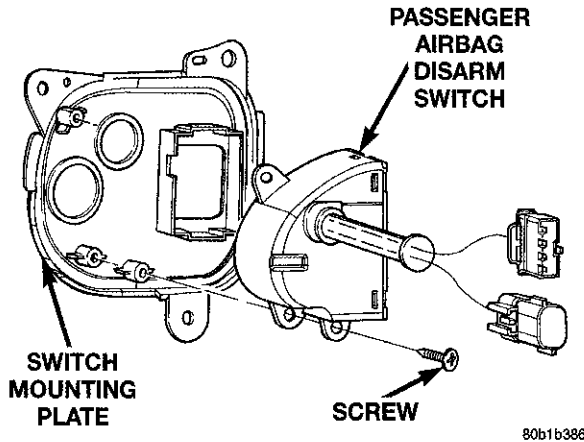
Passenger Airbag Disarm Switch Remove/Install
